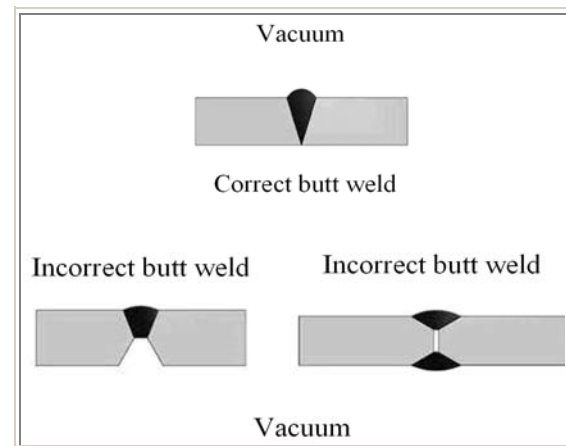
Examples of the correct and incorrect butt weld joint's design for the vacuum chamber [9]
